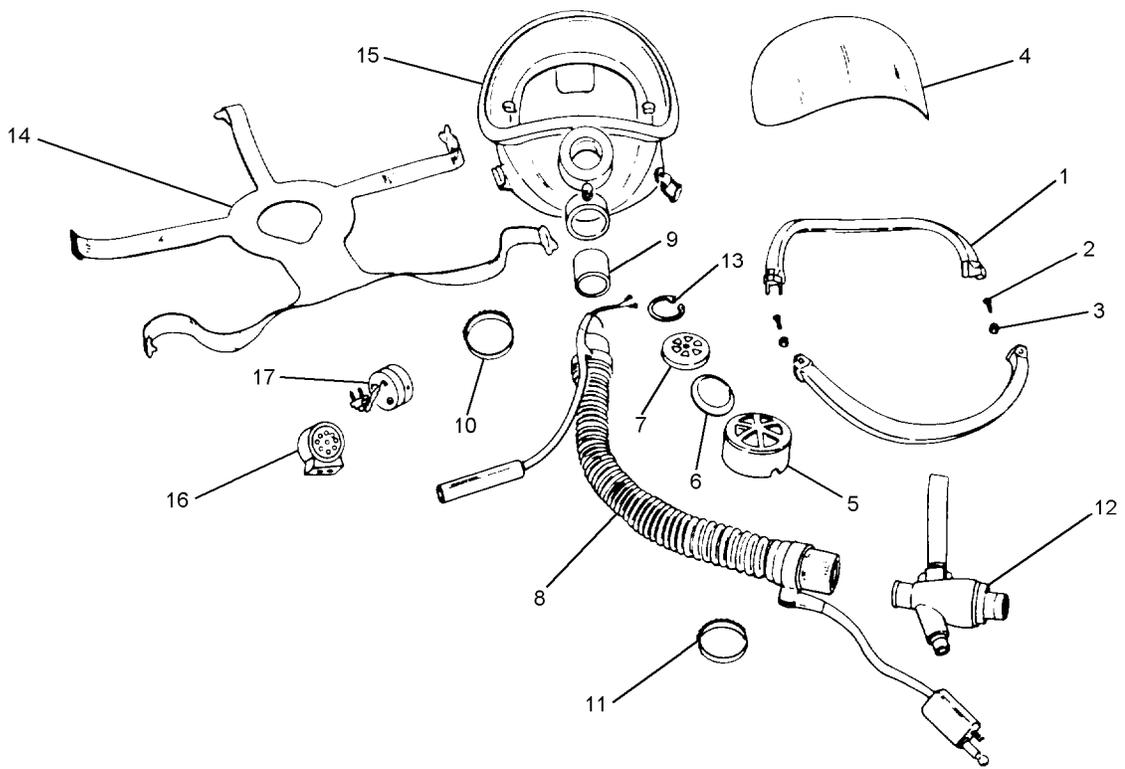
Full-Face Oxygen and Smoke Mask Assembly (MIL-M-19417B), IPB
